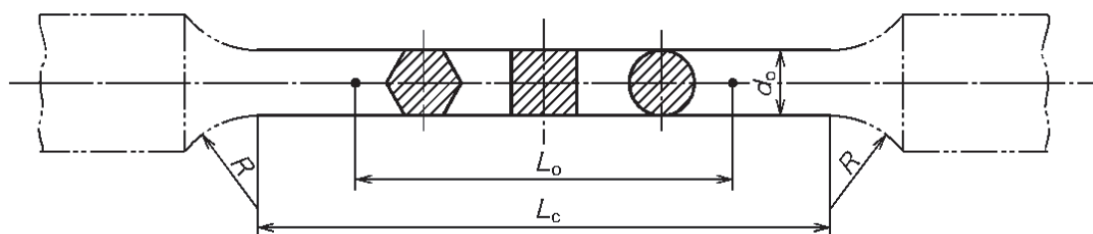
JIS14A type tensile test specimen¹⁻¹⁸⁾
